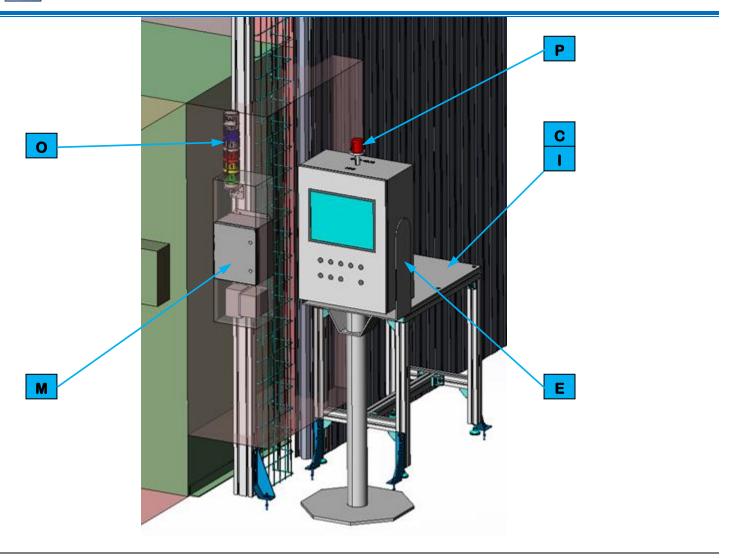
Electrical Leak Test Station EP280 & EP580 – Under Mezzanine.
